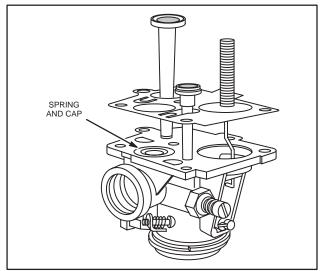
LOCATING DIAPHRAGM ON CARBURETOR
